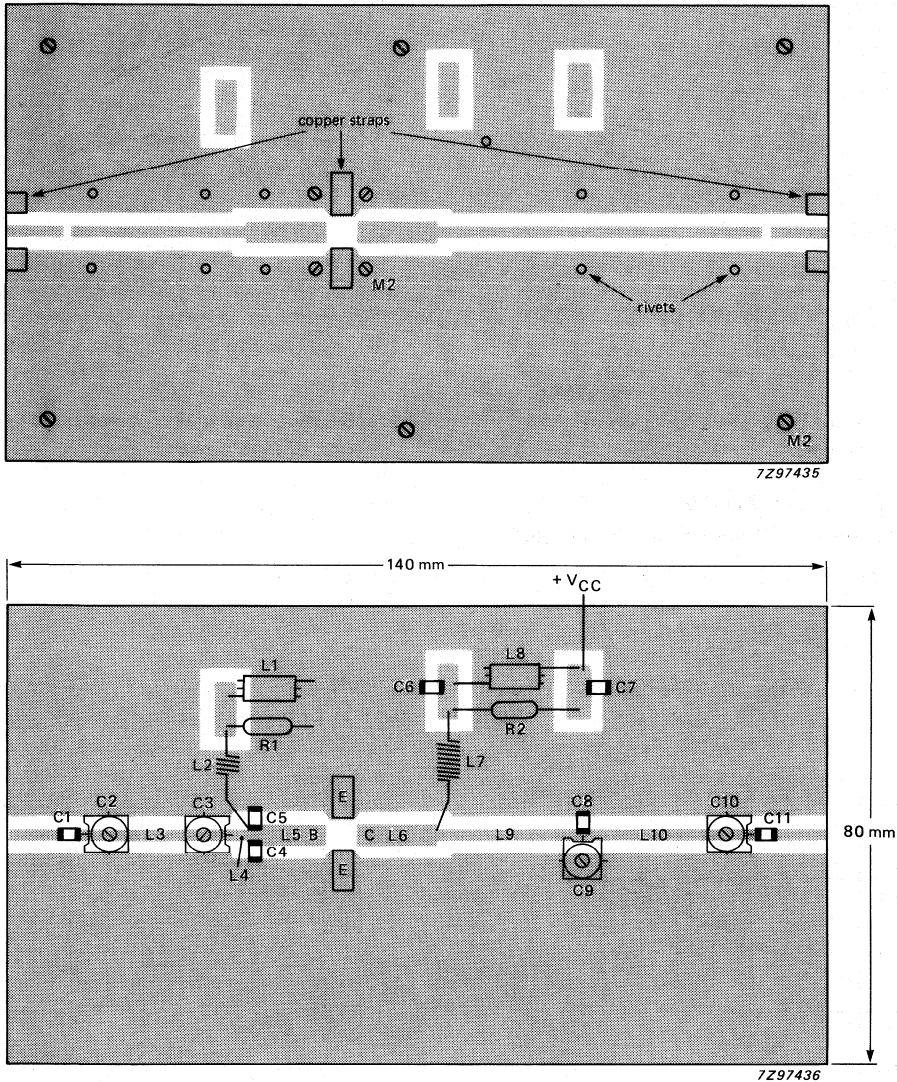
Printed-circuit board and component lay-out for 900 MHz class-B test circuit.
